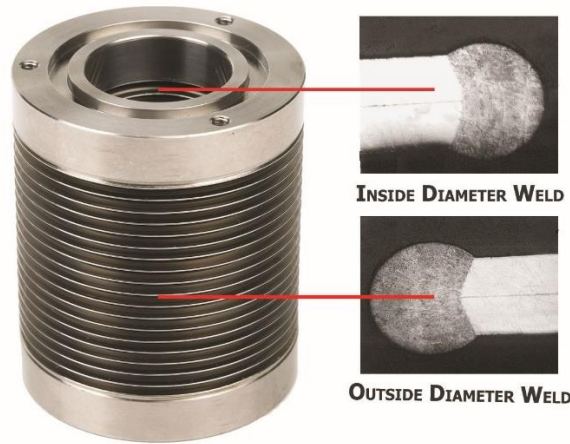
Edge welded bellow with end flanges, detail of welded joints (Bellowstech) [20]
